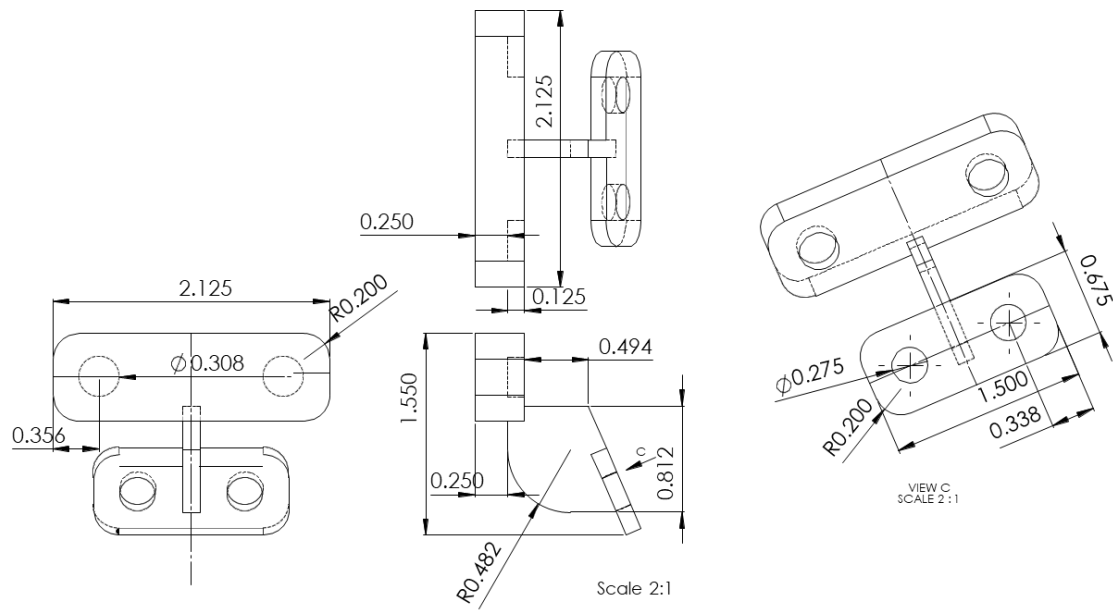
2D Drawing of connectors. Dimensions in inches.
